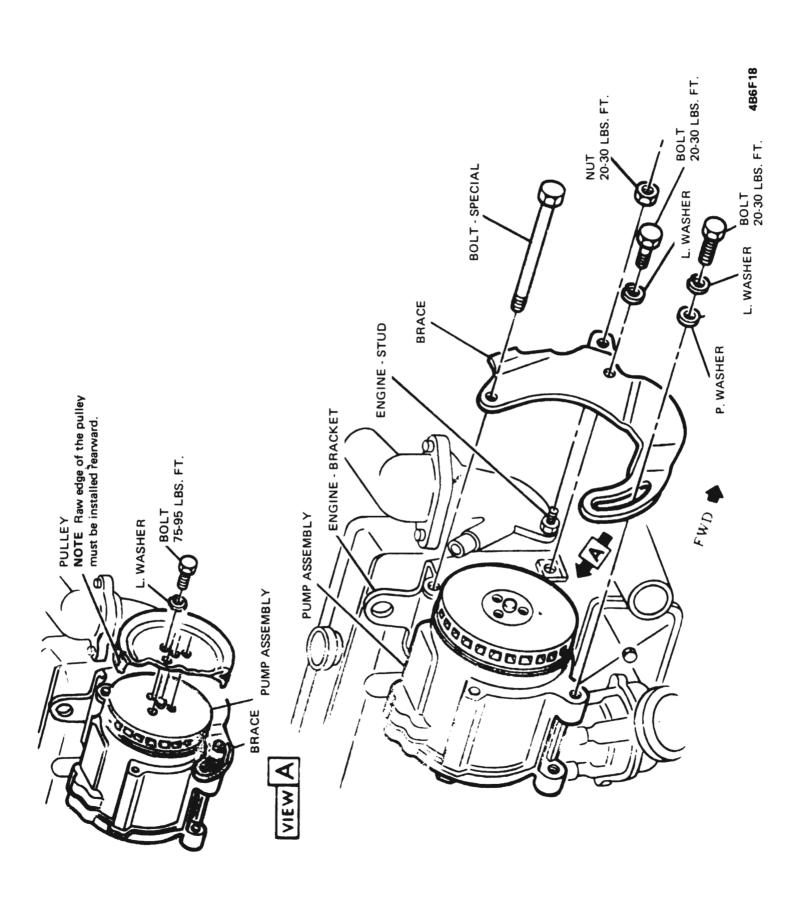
F-18 "X" Series A.I.R. Pump Mounting (L-6 Engine)
